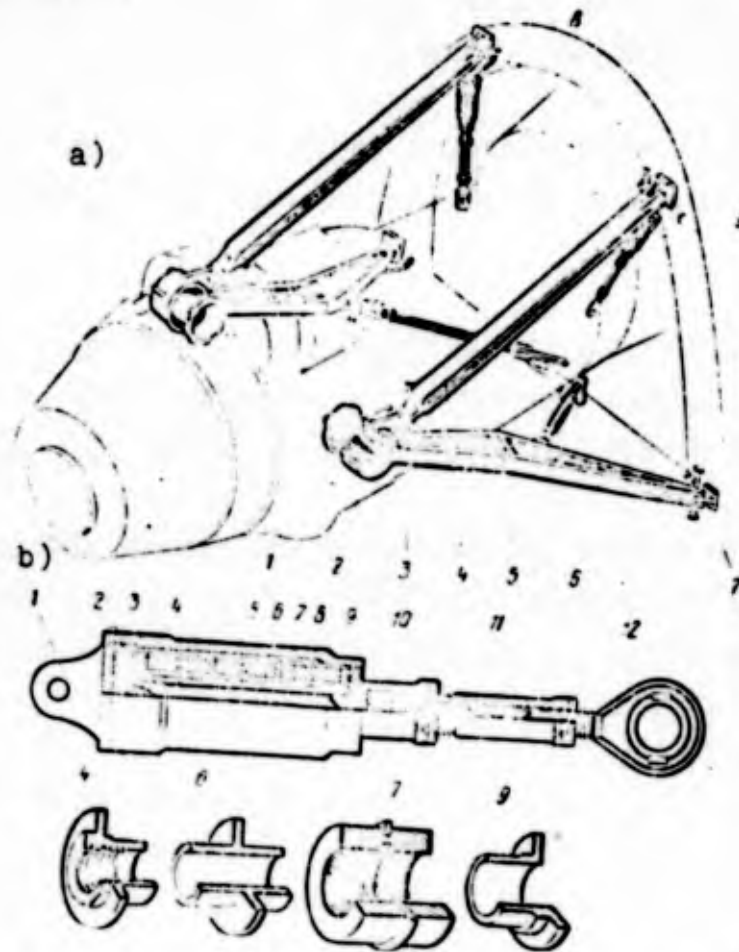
Truss-beam for attaching a turboprop engine to a nacelle: a) general view: 1 - front journal; 2 - front damper; 3 - connecting link; 4 - upper strut; 5 - beam; 6 - internal strut; 7 - bracket; 8 - electrical bonding short-circuiting connector; 9 - rear strut - rod damper; b) rear strut - the damper: 1 - bracket; 2 - stop screw; 3 - housing; 4 - nut; 5, 6 and 9 - bushings; 7 - disk damper; 8 - ring; 10 - central rod; 11 - transfer bushing; 12 - eye.
